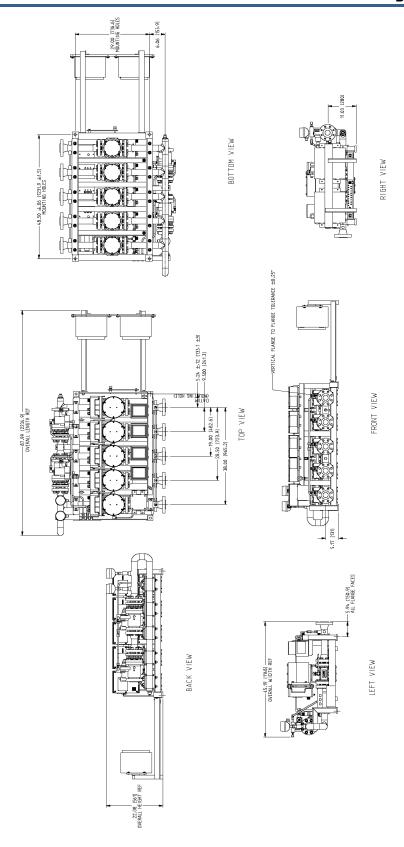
Standard Woodward GS50 (Stainless Steel Body) Gas Fuel Skid Detailed View
